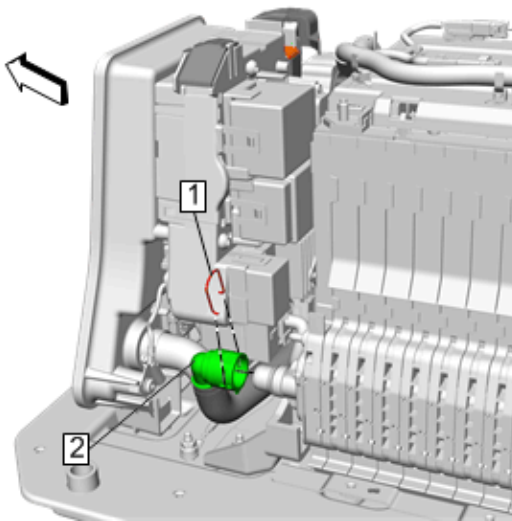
High Voltage Battery Cooling Manifold Outlet Hose And Retainer
